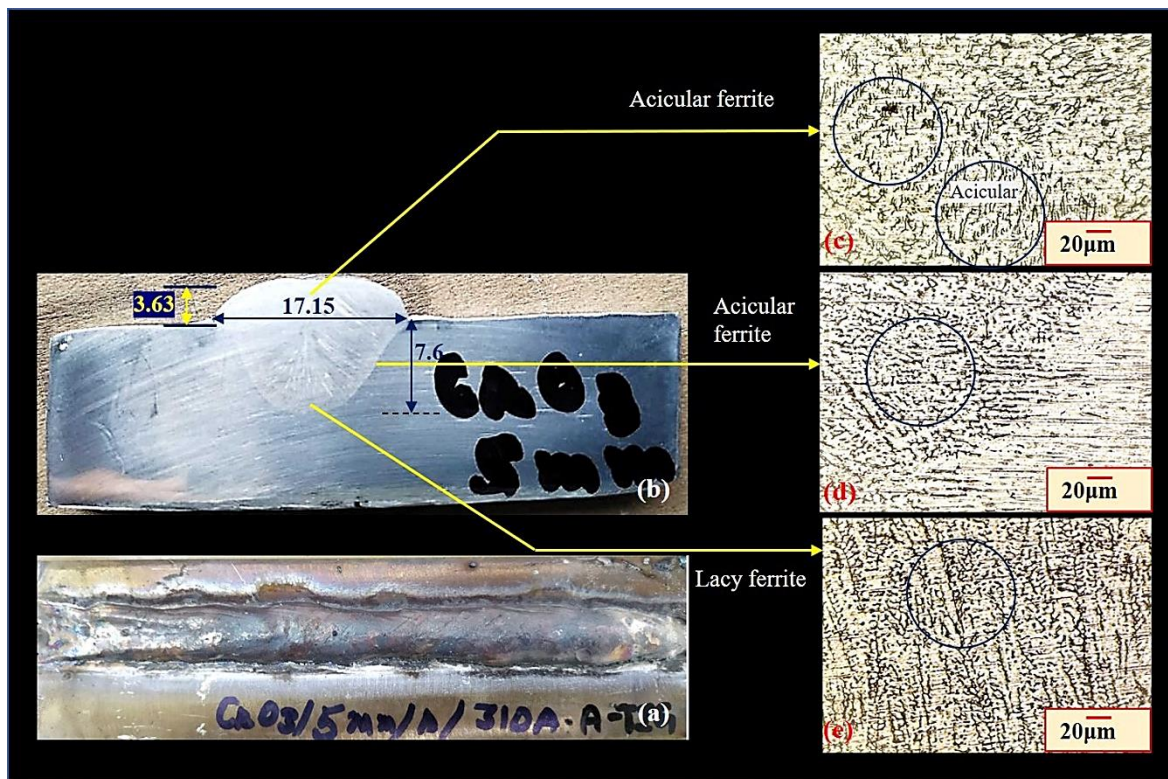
Photograph contains (a) Hybrid welded coupon using CrO_3 flux at 5 mm/s welding speed (b) Macrograph of the etched specimen (c), (d), and (e) showing the microstructure of different regions of weld bead
